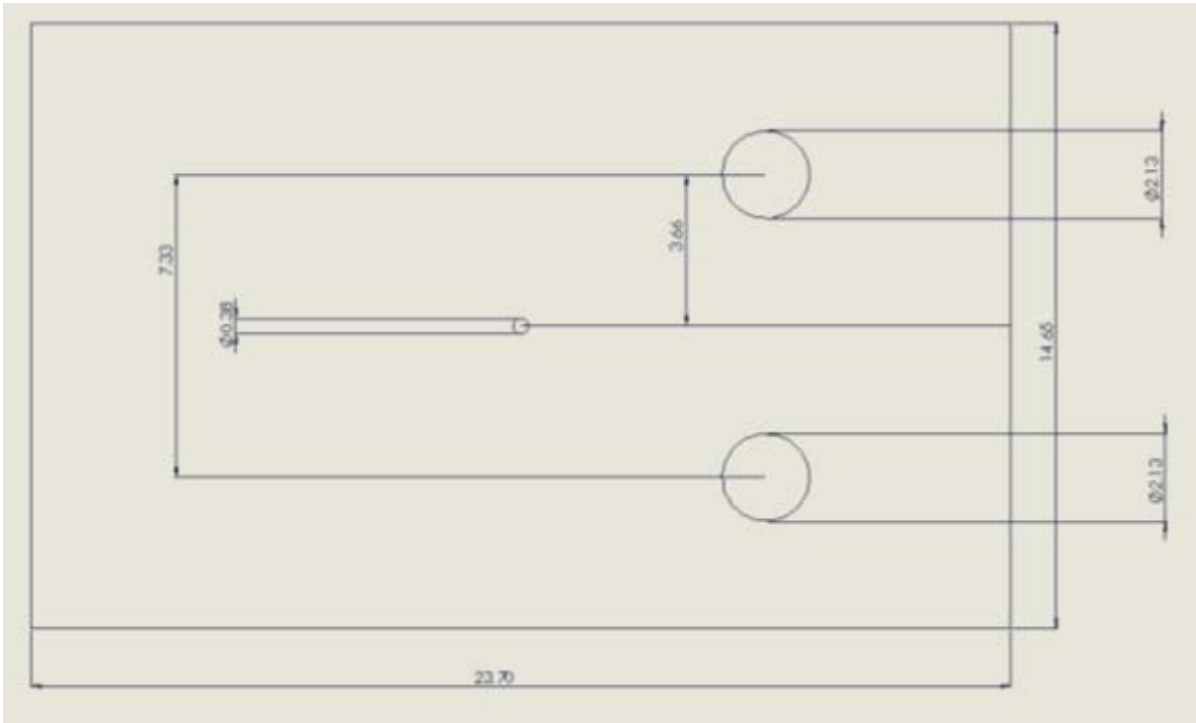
Reservoir 5_1 Dimensional Drawing
